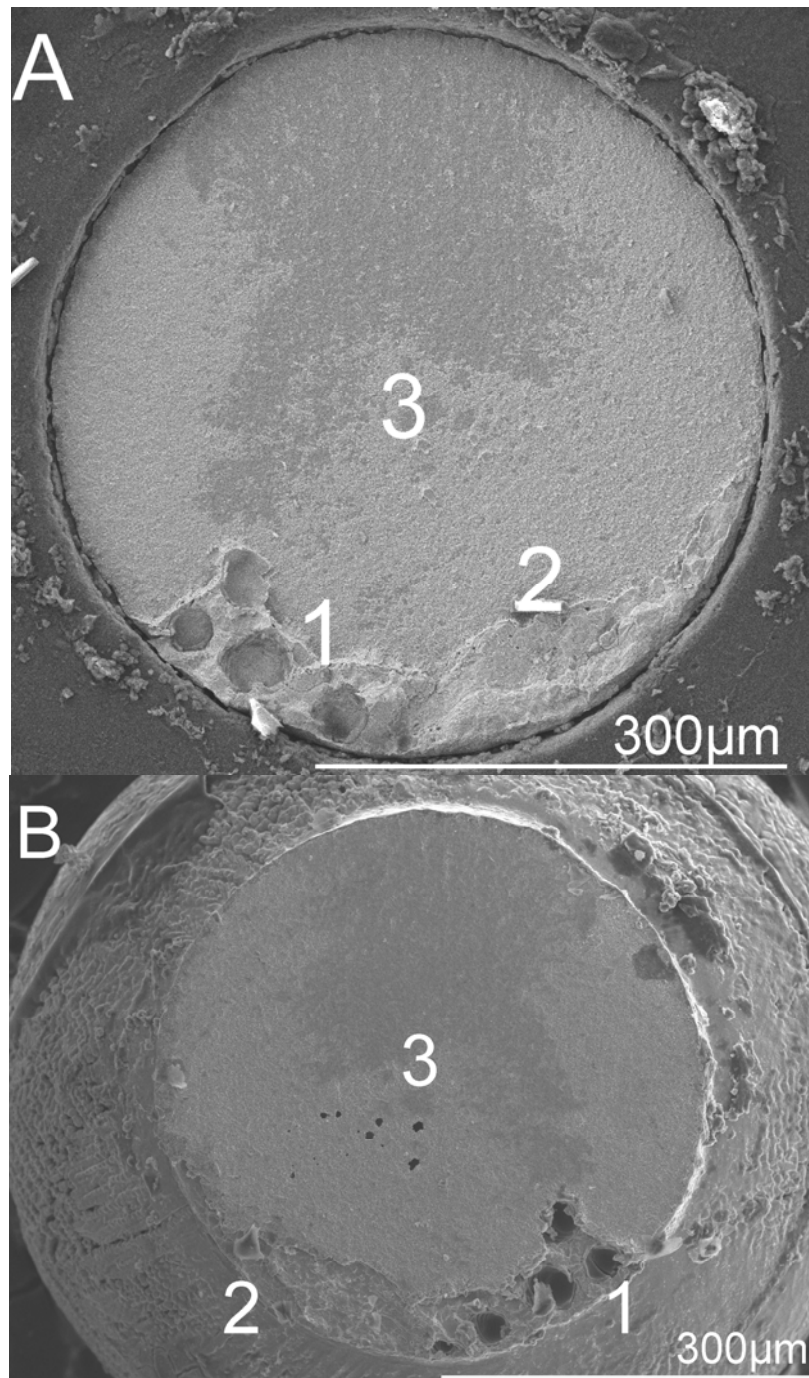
Fatigue fracture surfaces of Sample A, (a) board fracture surface; (b) ball fracture surface Note: Regions 1 and 2 are fatigue crack initiation sites. (B. Fiedler, 2007)
